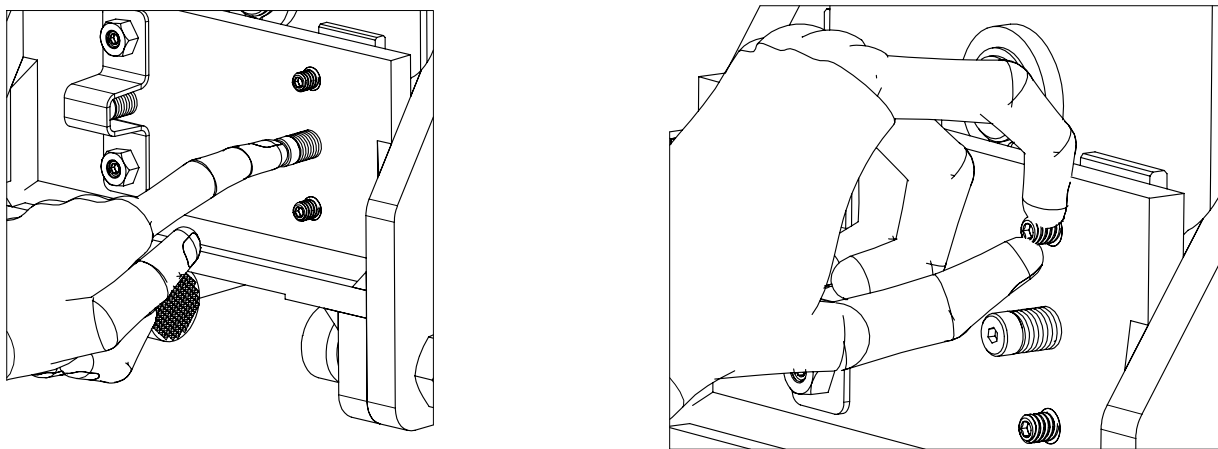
and 9: Pushing the spring pin while finger tightening screws
